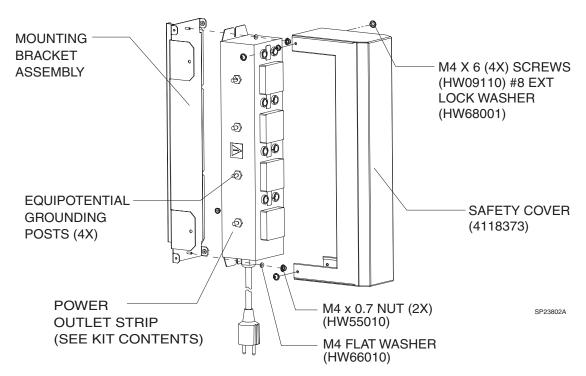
A. Non USA/Canada Power Outlet Strip Assembly Configurations on Fabius GS
